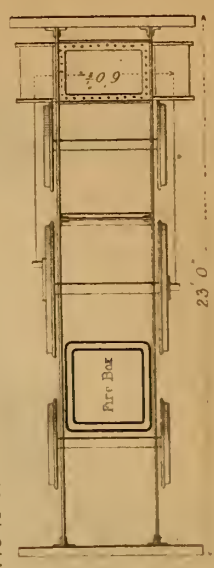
SINGLE FRAMED INSIDE CYLINDER ENGINE.
